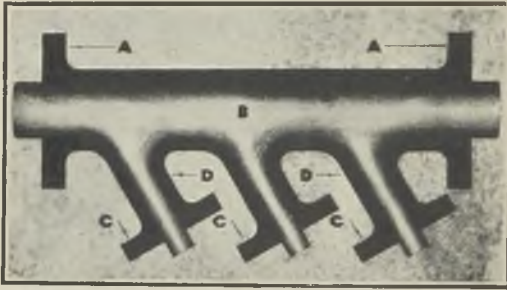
EASING OPERATIONS ON A FLANGED CASTING.
